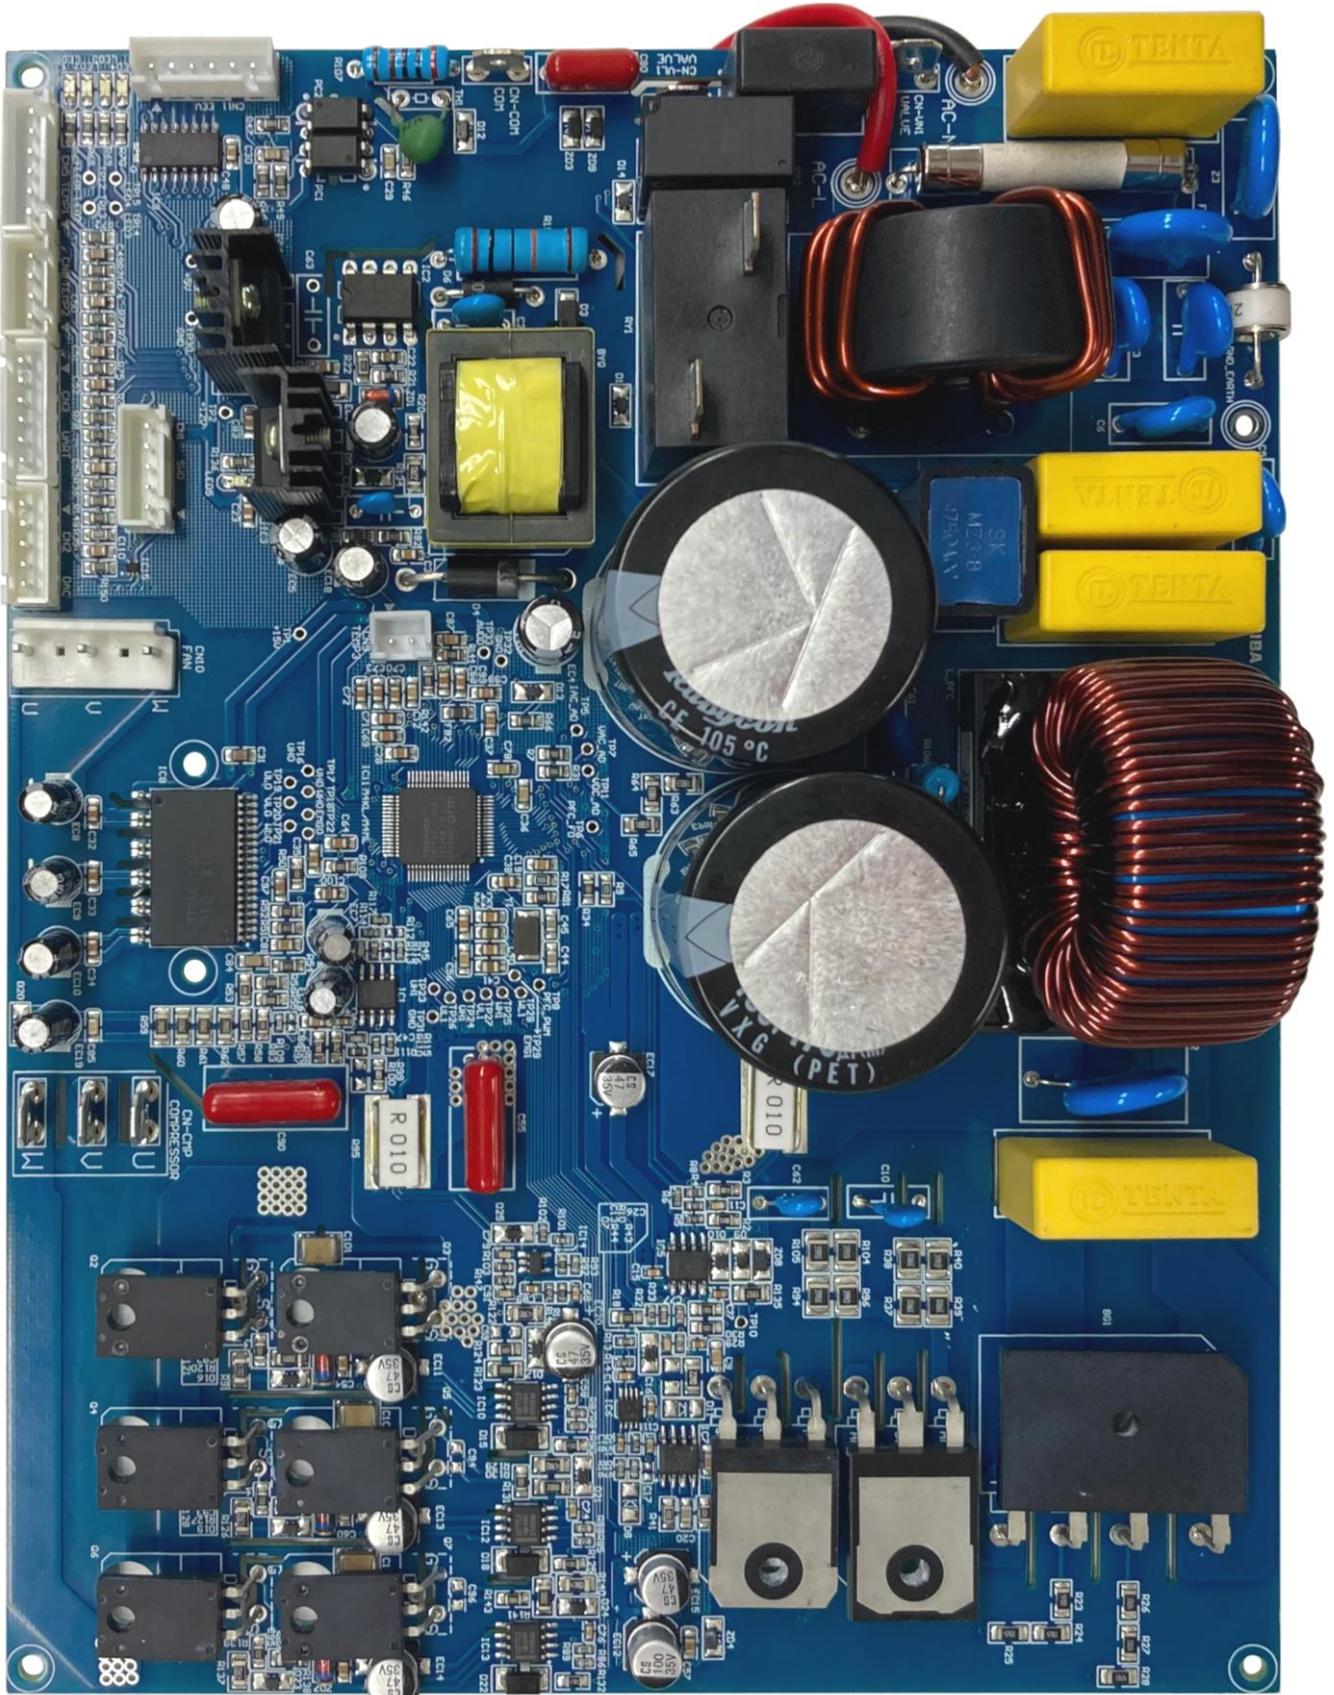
Front View of the Air Conditioner Outdoor Unit Circuit Board
